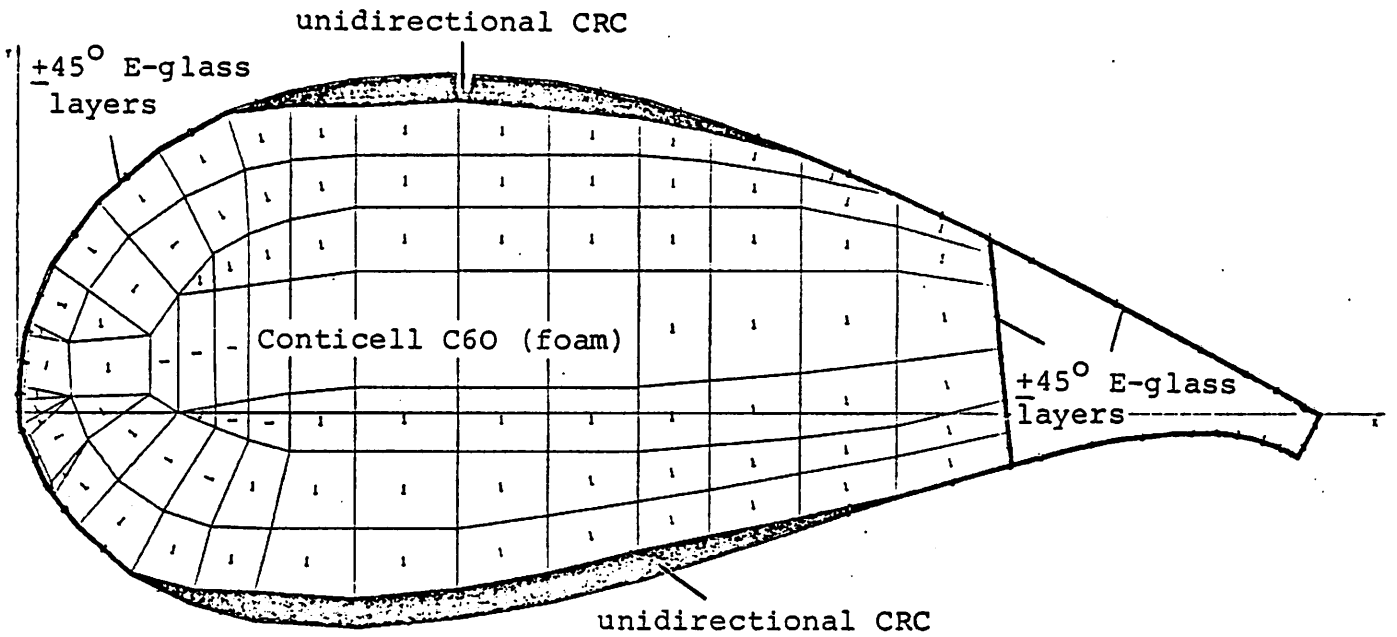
Typical Construction of a Cross Section of a CRC Blade
